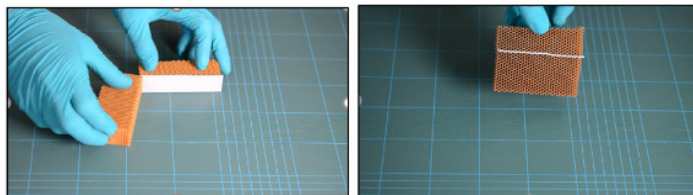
Samples of 3M AF 3074 FST (sheet cut into stripes or die cut) were manually applied to pieces of aramid honeycomb core.
